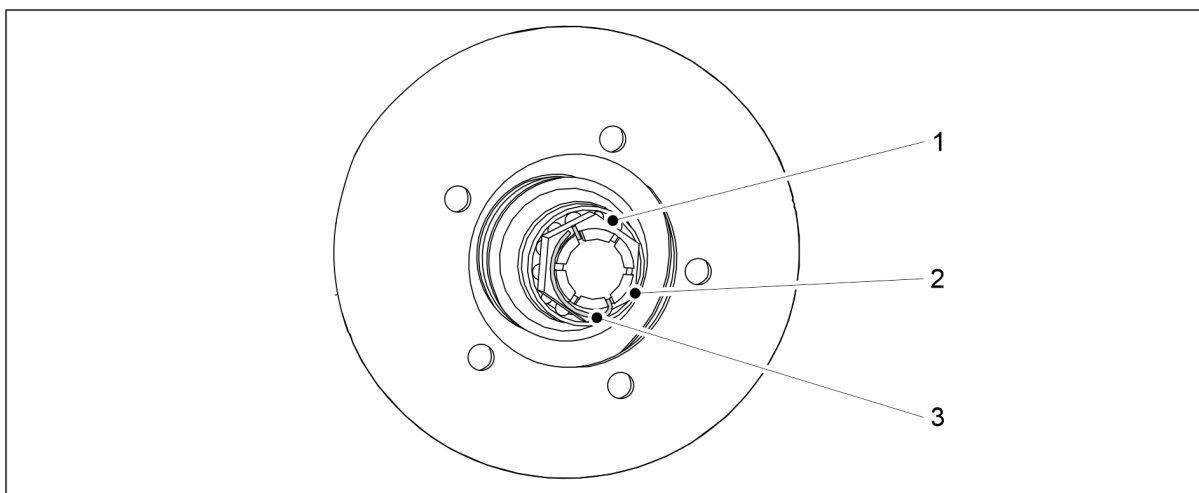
290. Tightening the bearing of the wheel hub
